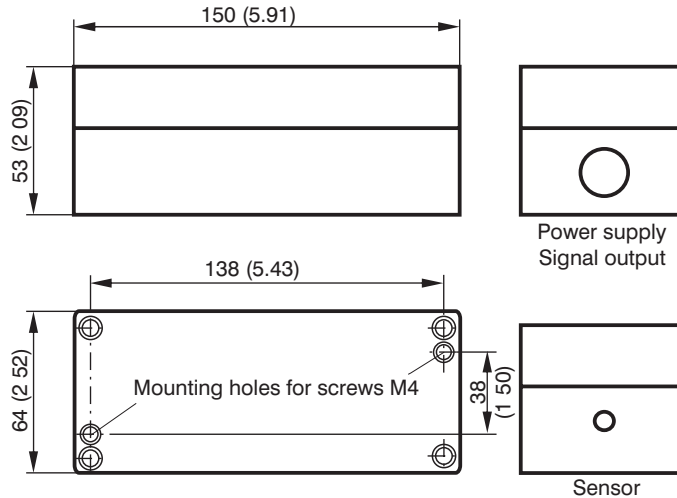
Dimensional drawing controller NLC3181.04 with connecting elements
